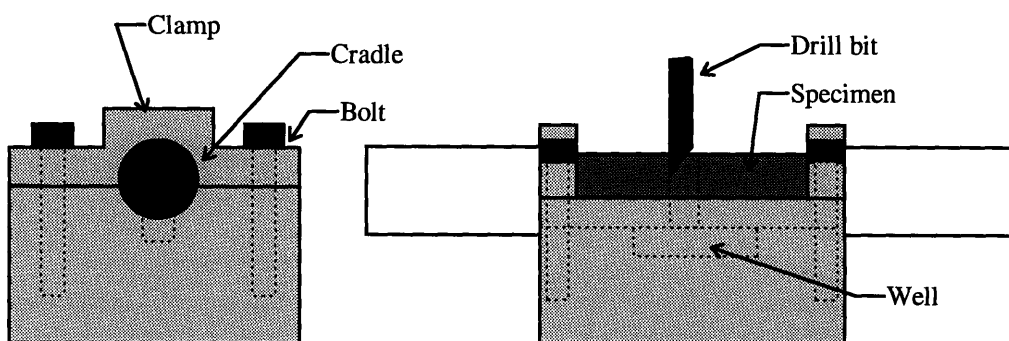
Delrin jig for milling/drilling defects into specimens.
